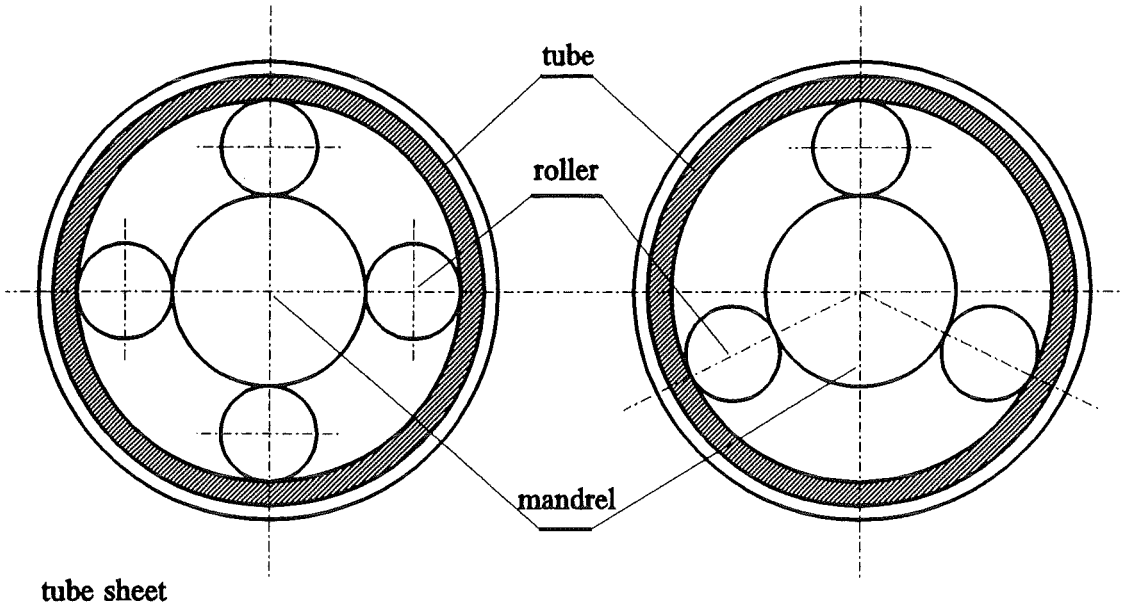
Tooling for tube-to-tube-sheet rolling
